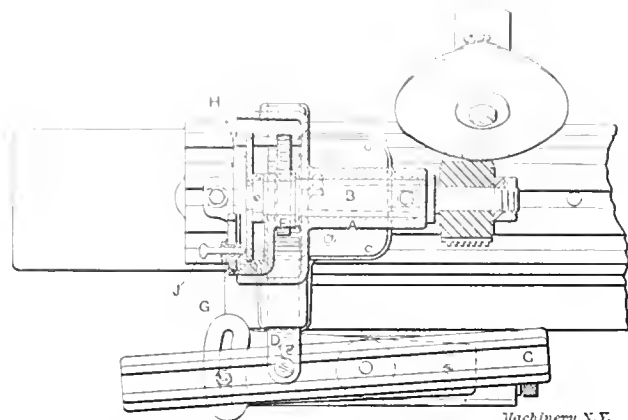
Plan View of Hob Sharpening Device with Helical Attachment.
